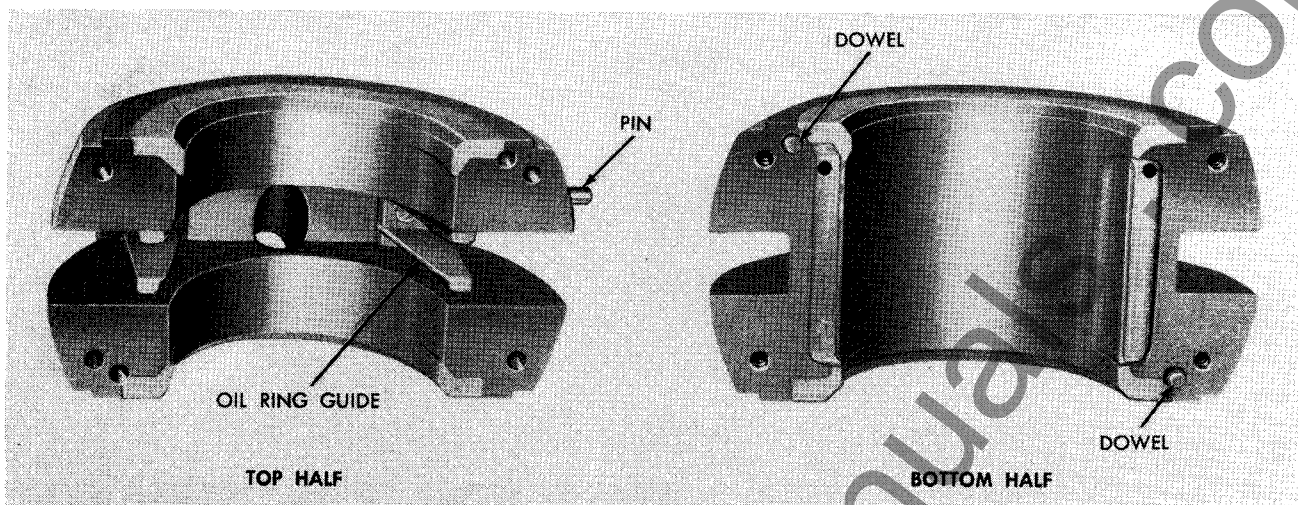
Spherical-Seat Bearing with Single Oil Ring
